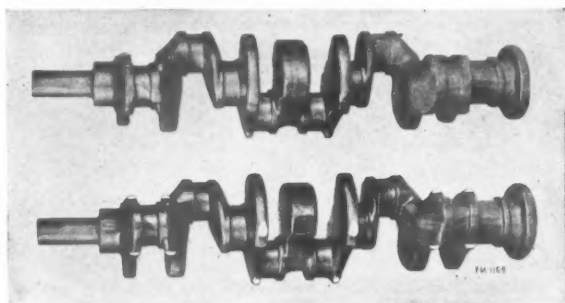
Crankshaft forgings before (upper) and after (lower) Rigidmiling 12 accurate locating surfaces.
